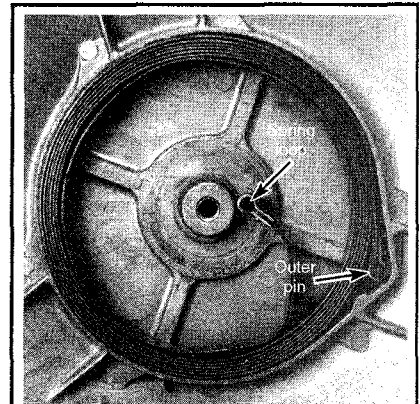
When installed, make sure the spring is coiled clockwise when followed from inner toward outer loop
